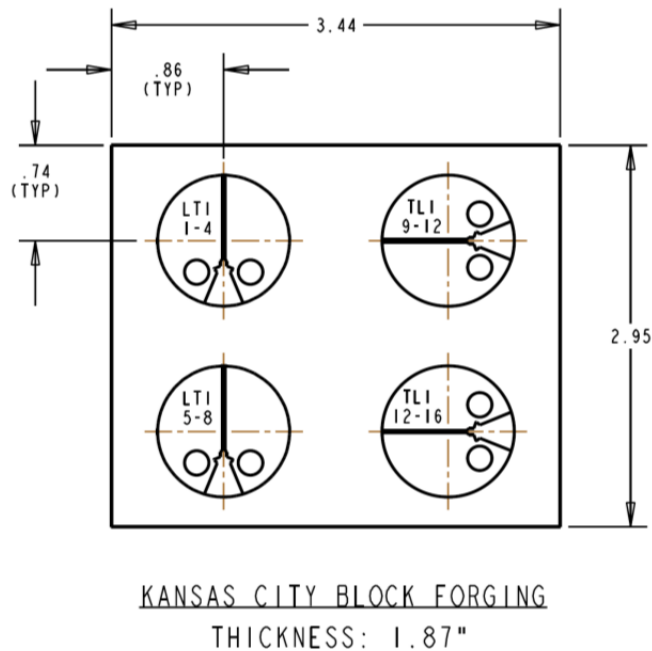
(a) Disc-Shape Fracture Toughness Specimen Showing Location and Orientation Within 7K0004 Forging. Dimensions are in Inches.
